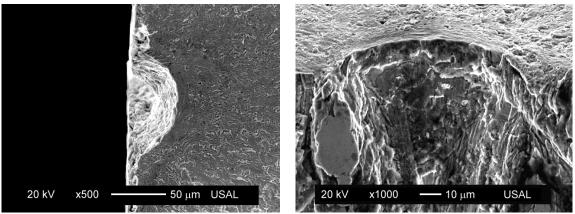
Surface defect caused by cold drawing producing transverse cracking in the prestressing steel wire (left) and magnification of the surface defect (and consequent fatigue crack growth) viewed from different angle (right)
